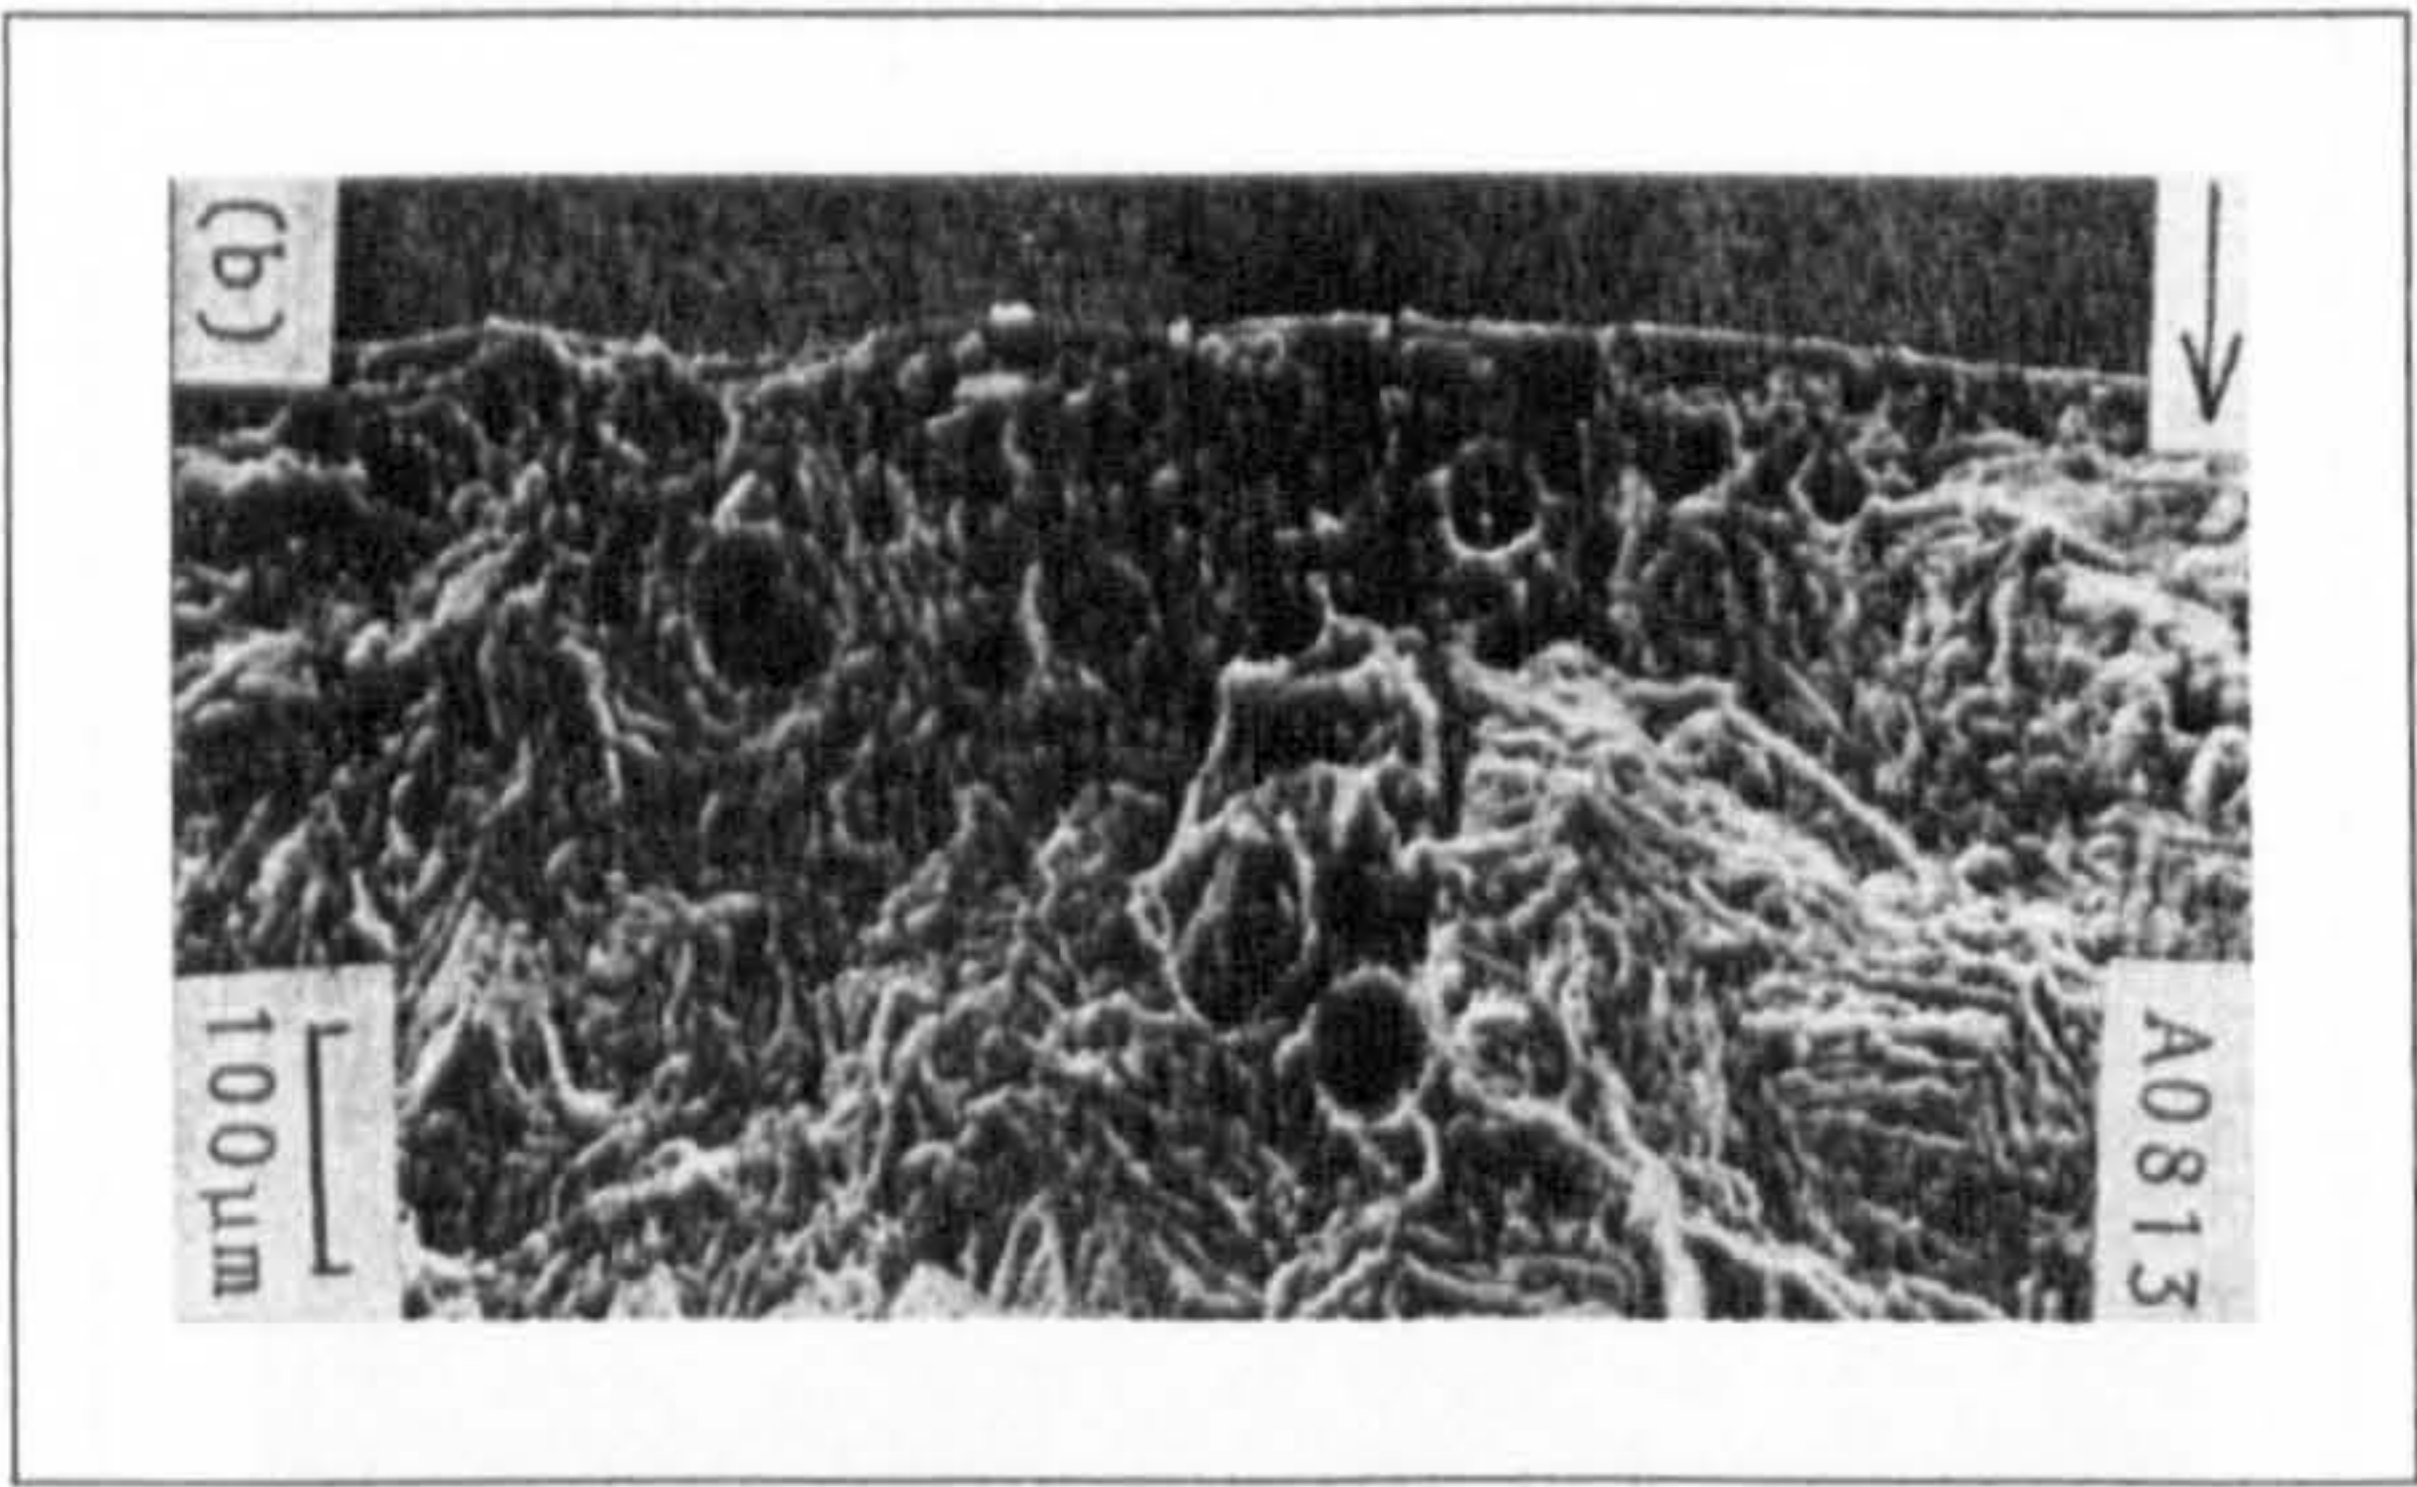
Porosity induced crack initiation sites in AA 5083-O weld metal¹.
